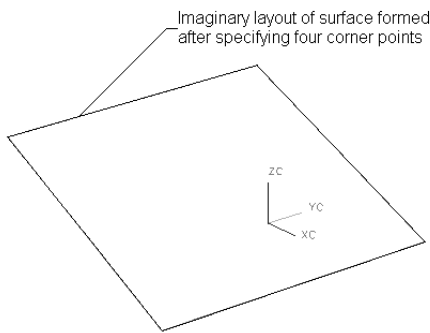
The imaginary layout of the surface formed after specifying the four points for corners
